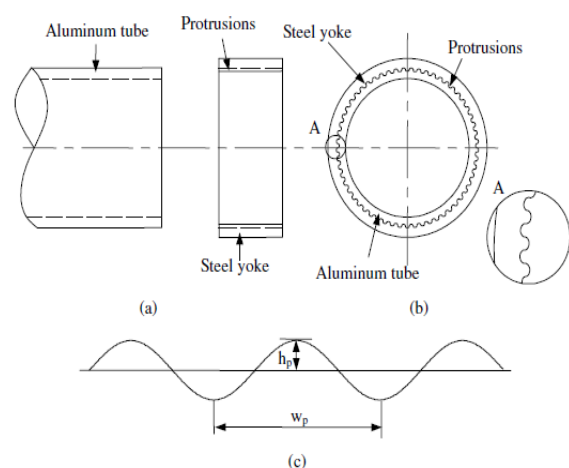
; Schematic diagram of press fitted joining method: (a) disassembled parts; (b) after assembly; (c) sinusoidal shape protrusion with aspect ratio h_p/w_p
